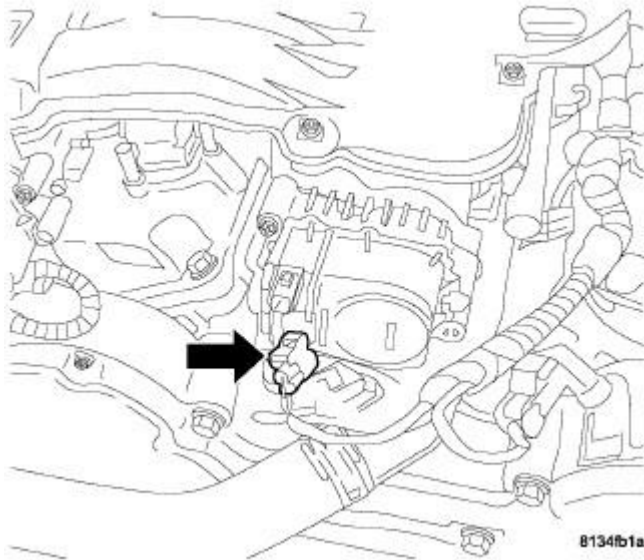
Short Runner Valve Solenoid Electrical Connector
